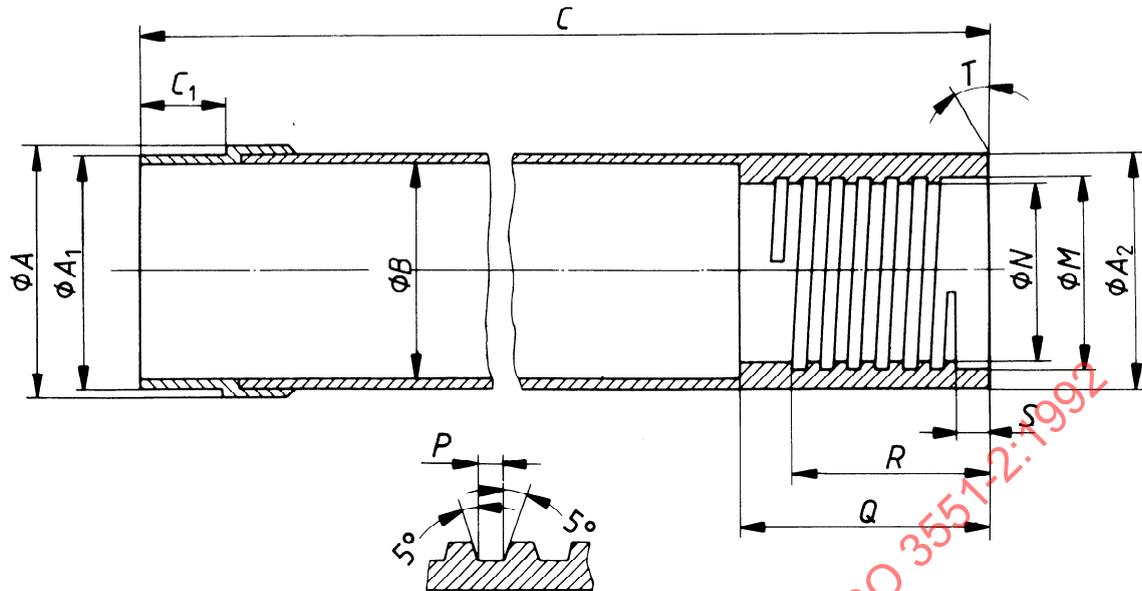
"WF" design double-tube core barrel — Inner tube (see table 26)
